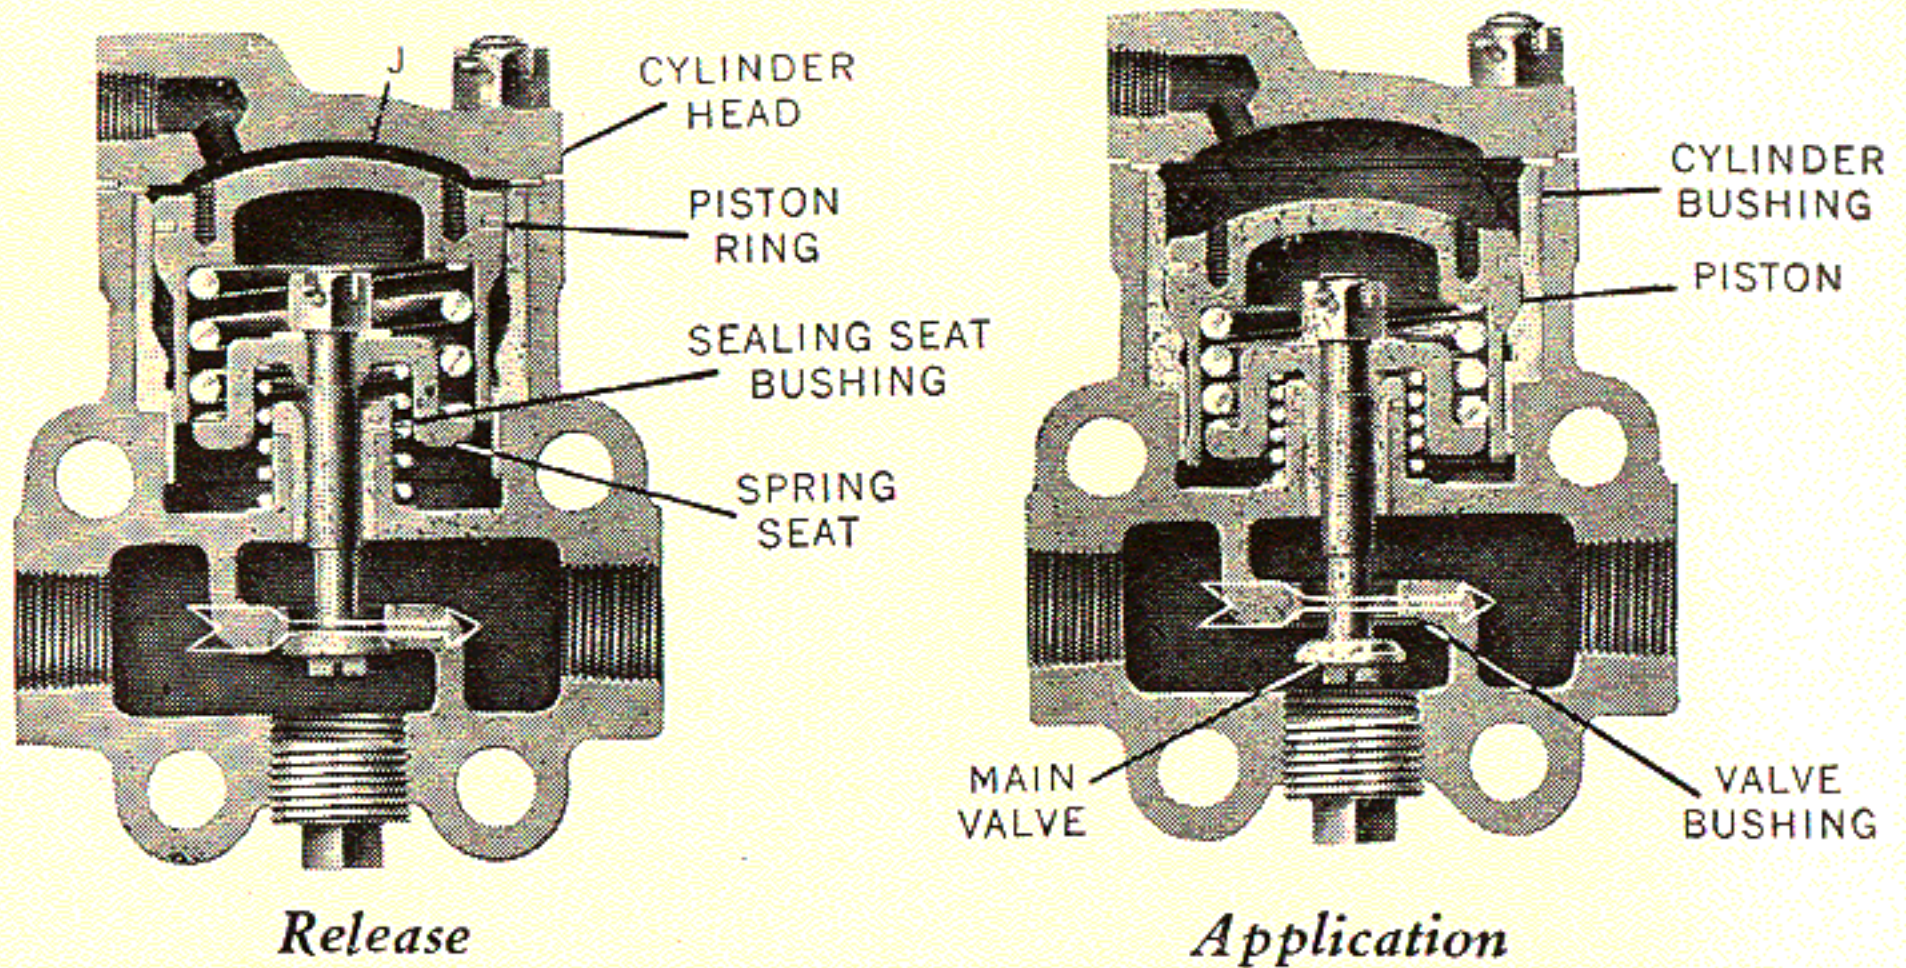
Type C-2 Booster Preliminary Throttle Valve
